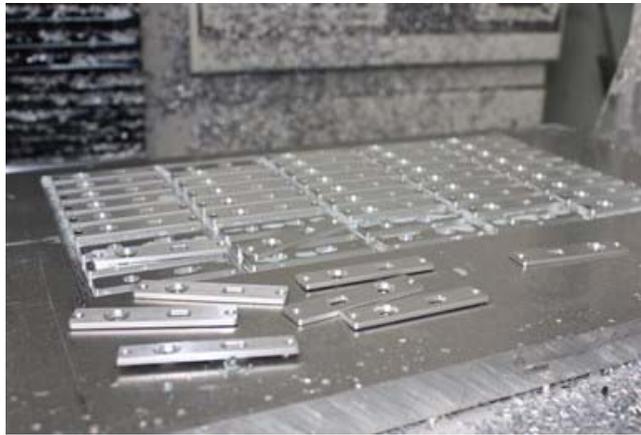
THE THIN PLATE DESIGN OF THIS ELECTRONICS PANEL IS SUPPORTED FROM THE BOTTOM USING A FIXTURE PLATE. THE SAME HOLES USED FOR FINAL ASSEMBLY ARE ALSO USED TO HOLD DOWN THE PARTS ON A FIXTURE PLATE.
